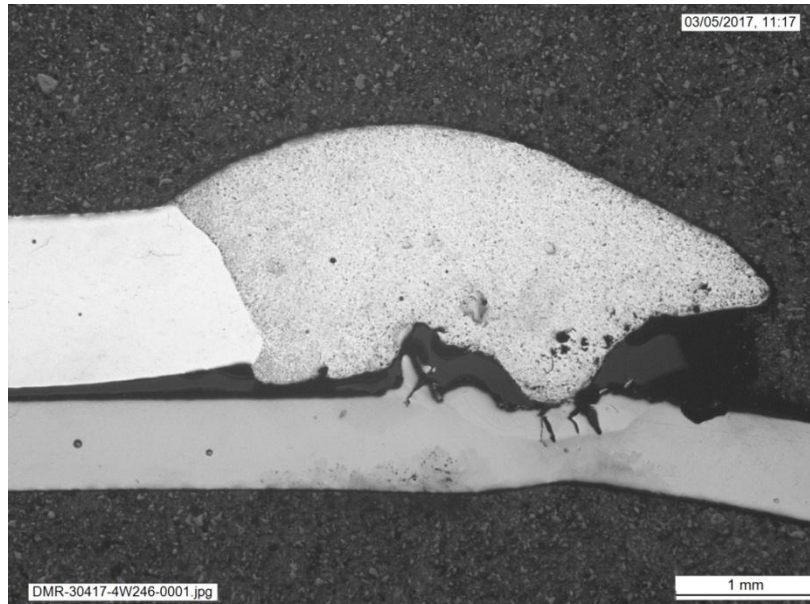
Image of tensile shear specimen after testing, GA base material using 1.6mm ZnAl15 filler wire
